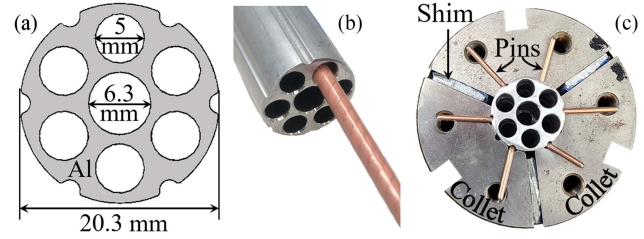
(a) Al conduit cross-sectional drawing. (b) Conduit with CORC® wire in one outer opening. (c) Conduit in 3-part collet with shims between collet pieces and folded-over restraining pins.
